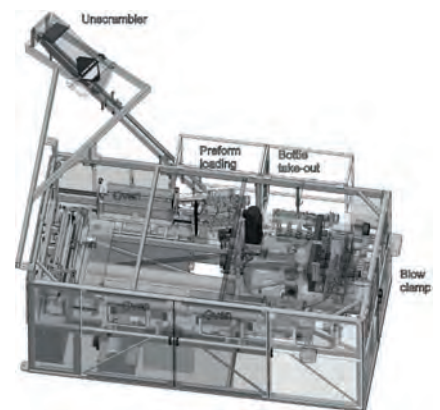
Layout of linear, five-cavity machine. Diagram courtesy of Amsler Equipment Inc.
